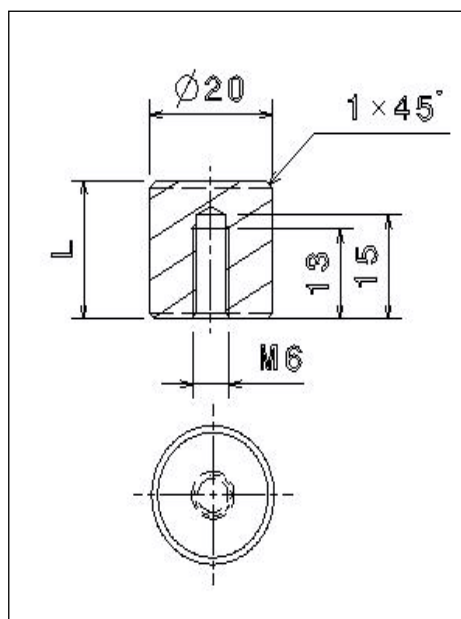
PUSH BACK PINS STROKE INSERTS
